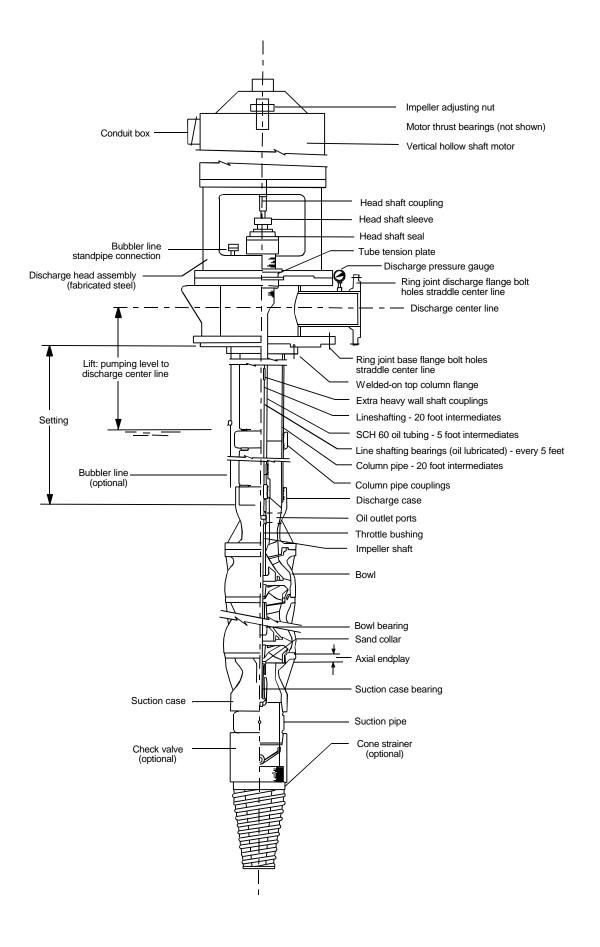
Typical lineshaft turbine pump with an enclosed oil-lubricated shaft.
